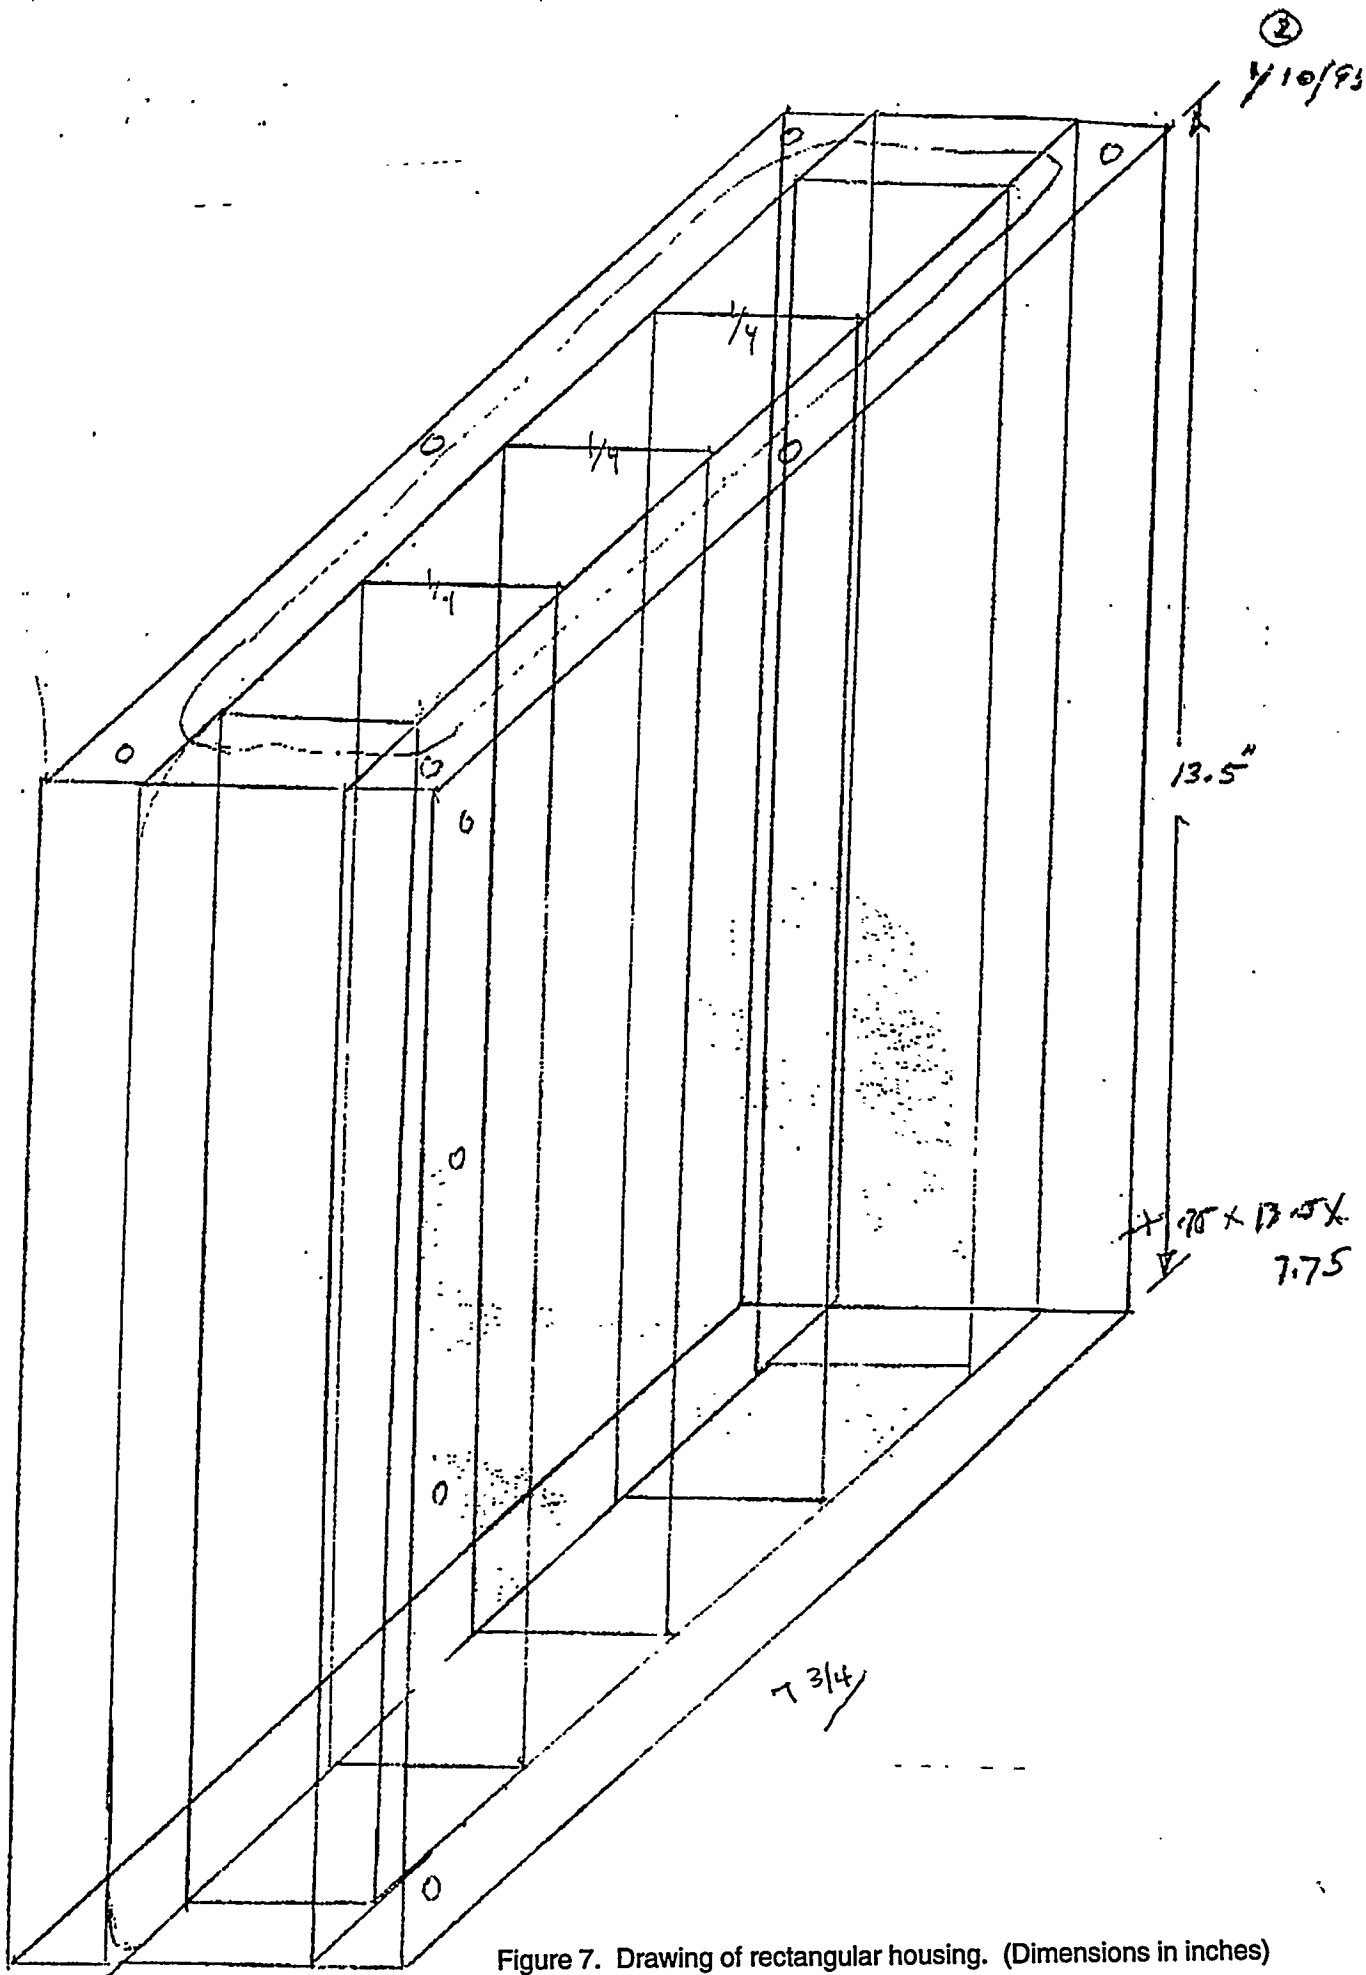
Drawing of rectangular housing. (Dimensions in inches)
